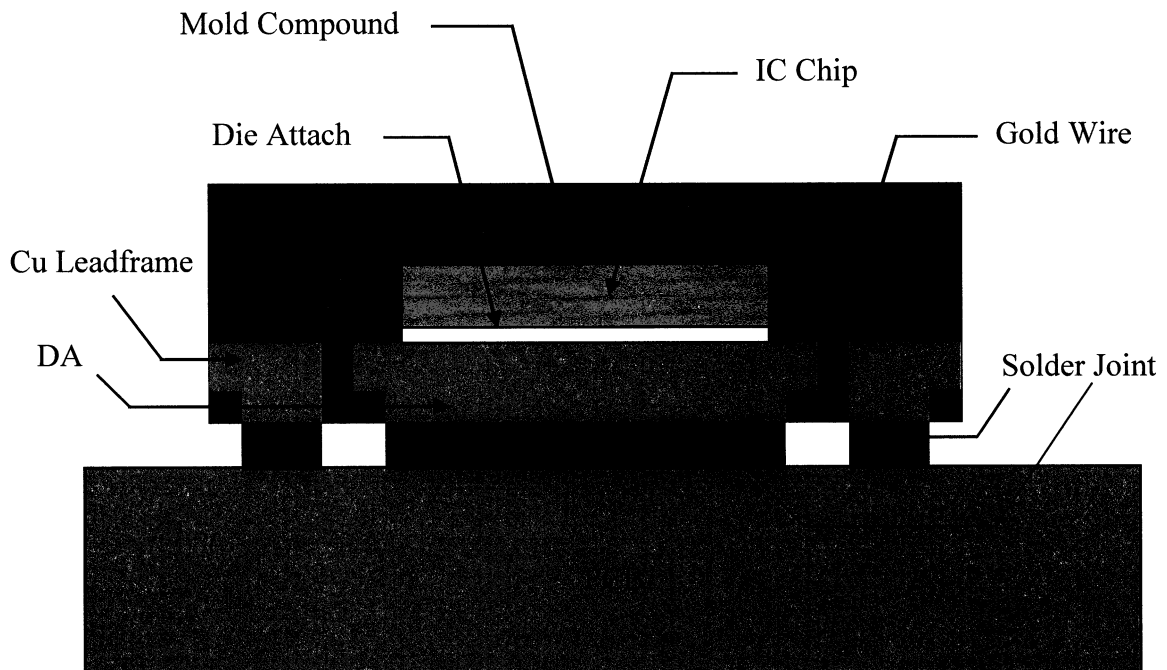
Schematic drawing of solder joint between LLP and PCB.
